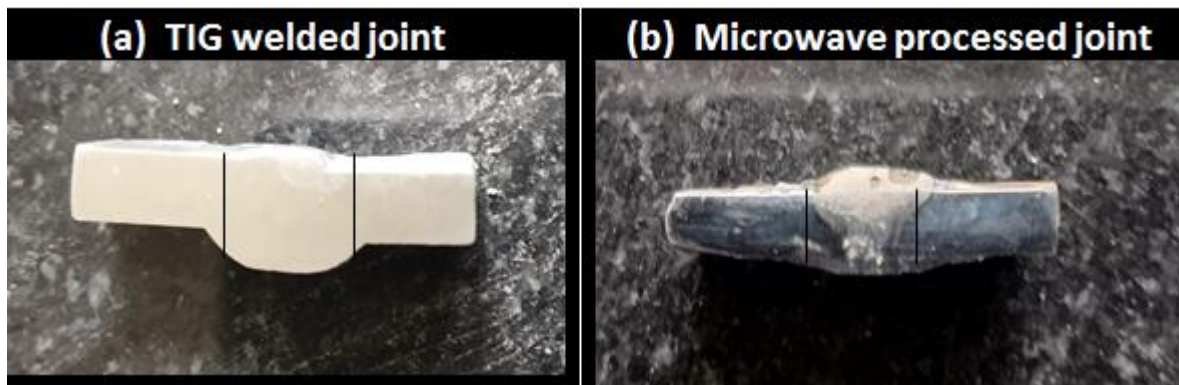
Joints of SS304 and Hastelloy C276 by (a) TIG welding and (b) Microwave joining
